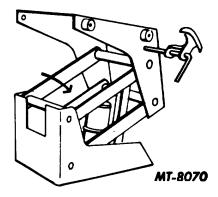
Upper Panel Assembly Raised to Permit Air Cylinder Removal
